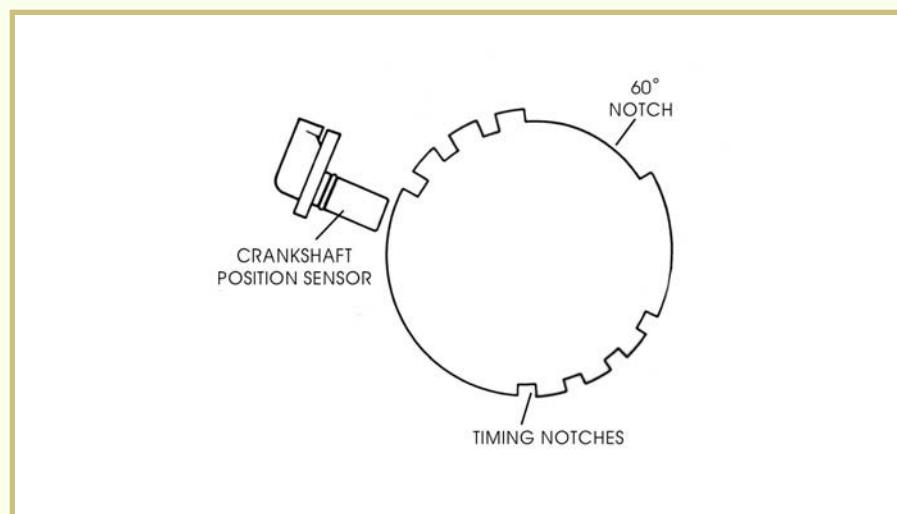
An illustration of the wheel and sensor used in this system is shown here. (Courtesy of Chrysler Corporation)
